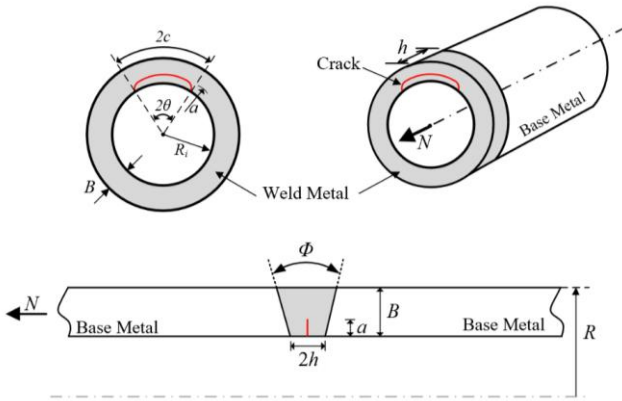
Geometry of the pipe girth weld with an inner surface crack
